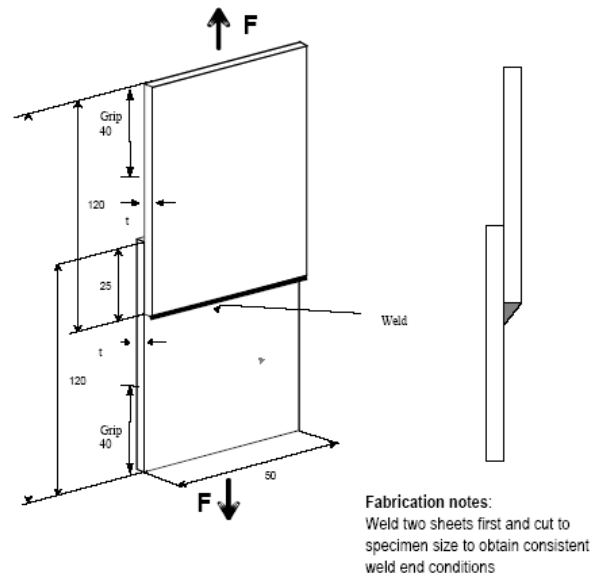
MIG Welded Single-Lap Shear Specimen
